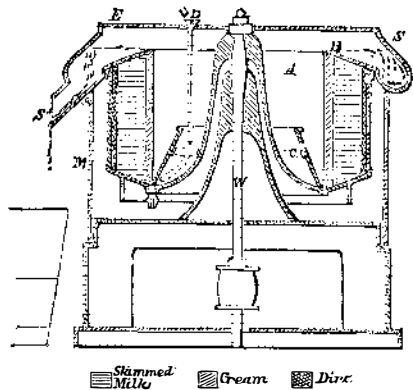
CENTRIFUGAL MILK-SKIMMING MACHINE.
